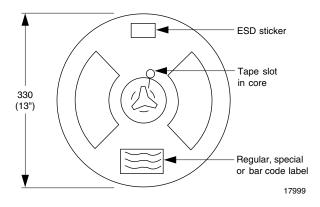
Tape and Reel Shipping Medium (EIA-481, revision A, and IEC 60286), 2000 units per reel
